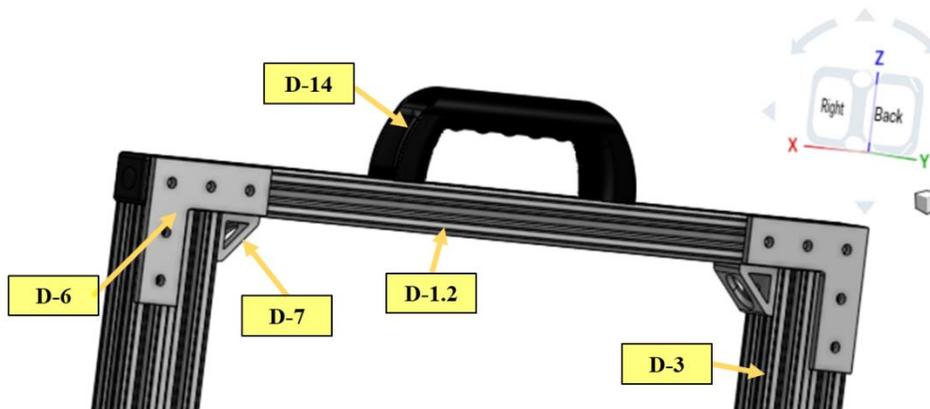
Attach Outer Upper Horizontal Strut to Outer Vertical Struts of Donning Stand.
